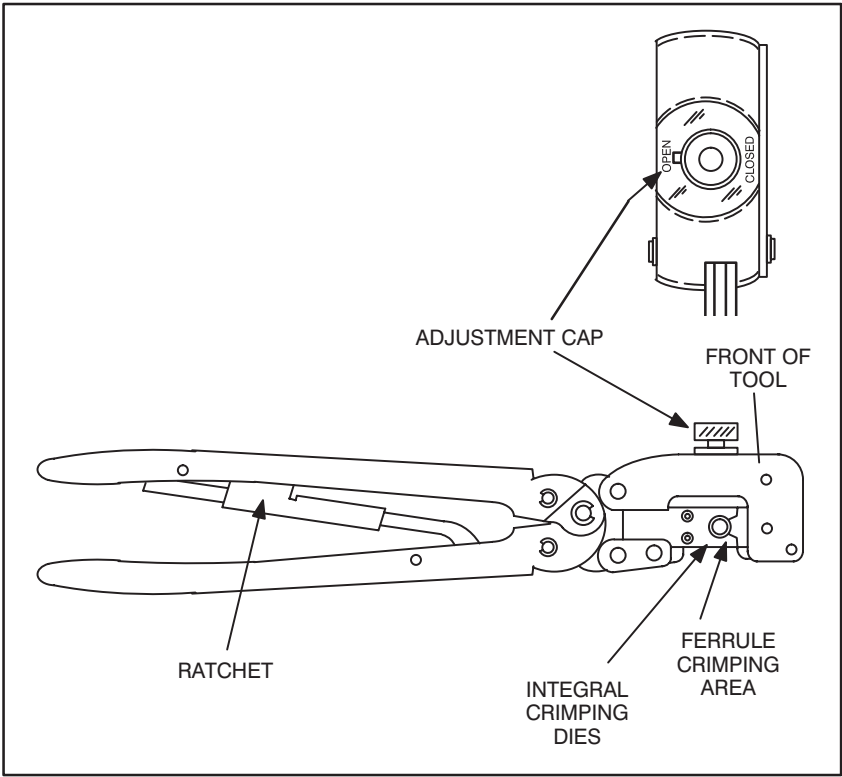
Turn Adjustment Cap to OPEN Position
